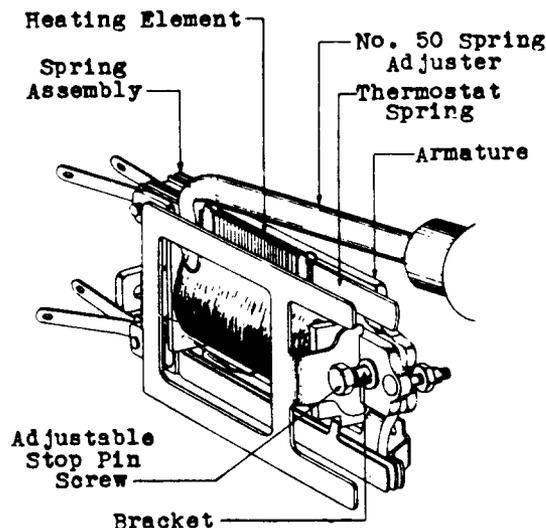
Method of Adjusting For Stud Gap on the Thermostat Spring
